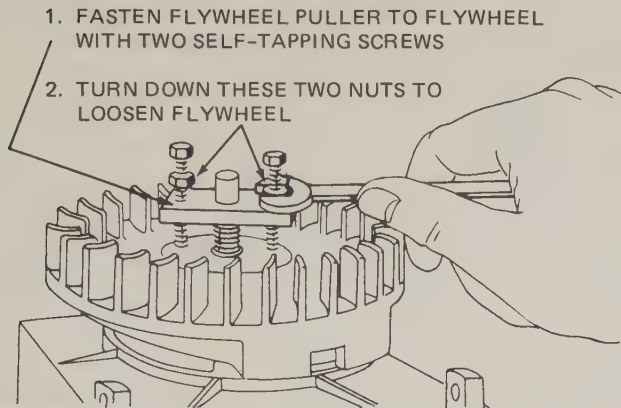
Using self-tapping screws to remove the flywheel from the crankshaft. (Briggs & Stratton Corporation)
